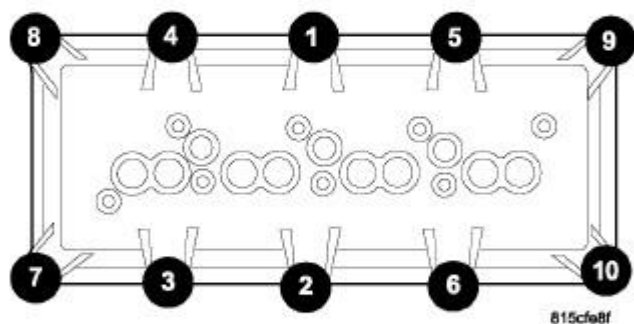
Cylinder Head Cover Removal/Tightening Sequence
